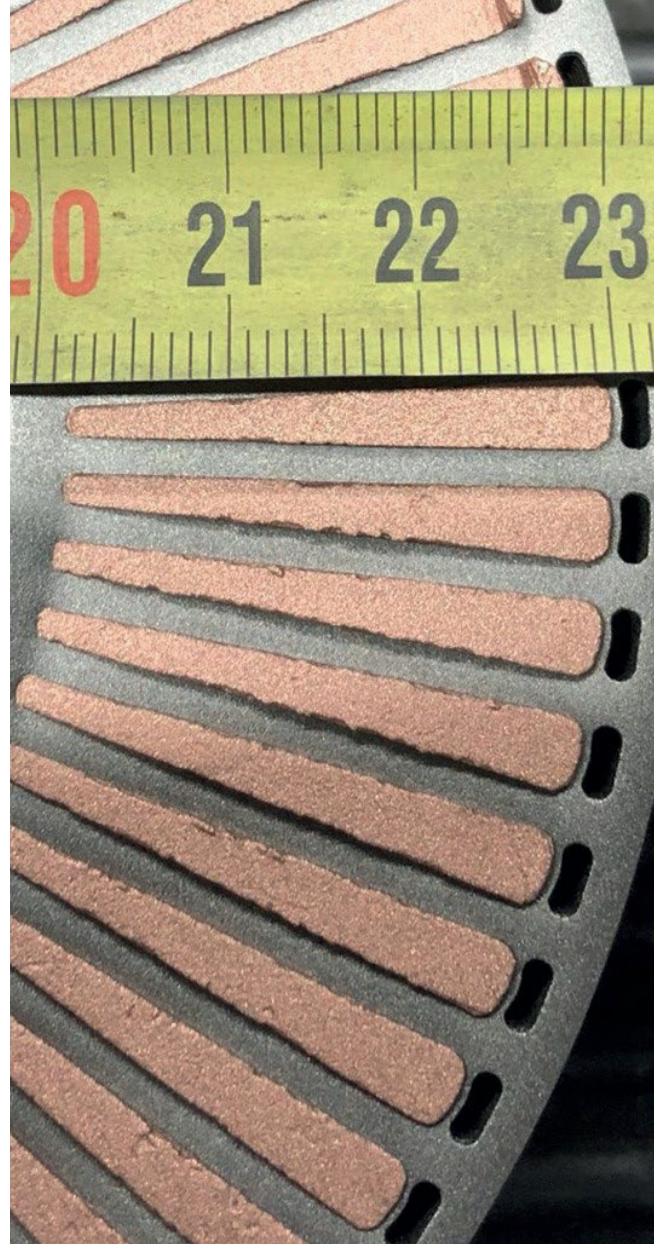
Saw cut of a copper rotor produced by laminar squeeze casting.
